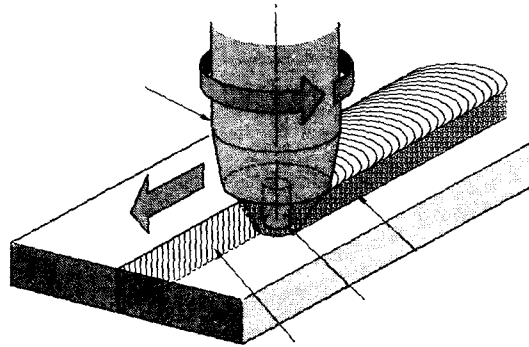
Friction Stir Welding (FSW) Process
